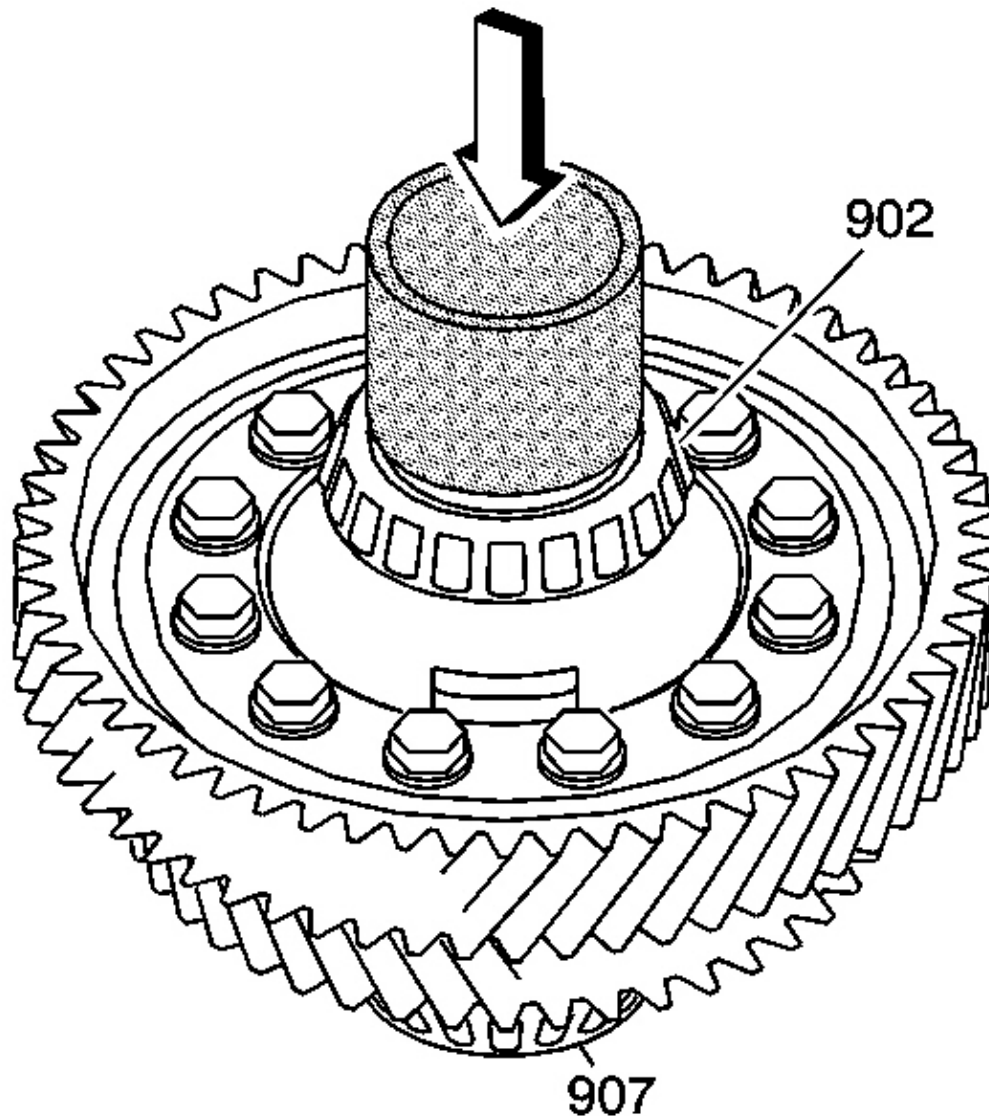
Installing Front Differential Tapered Front/Rear Roller Bearing Using DT 46432
